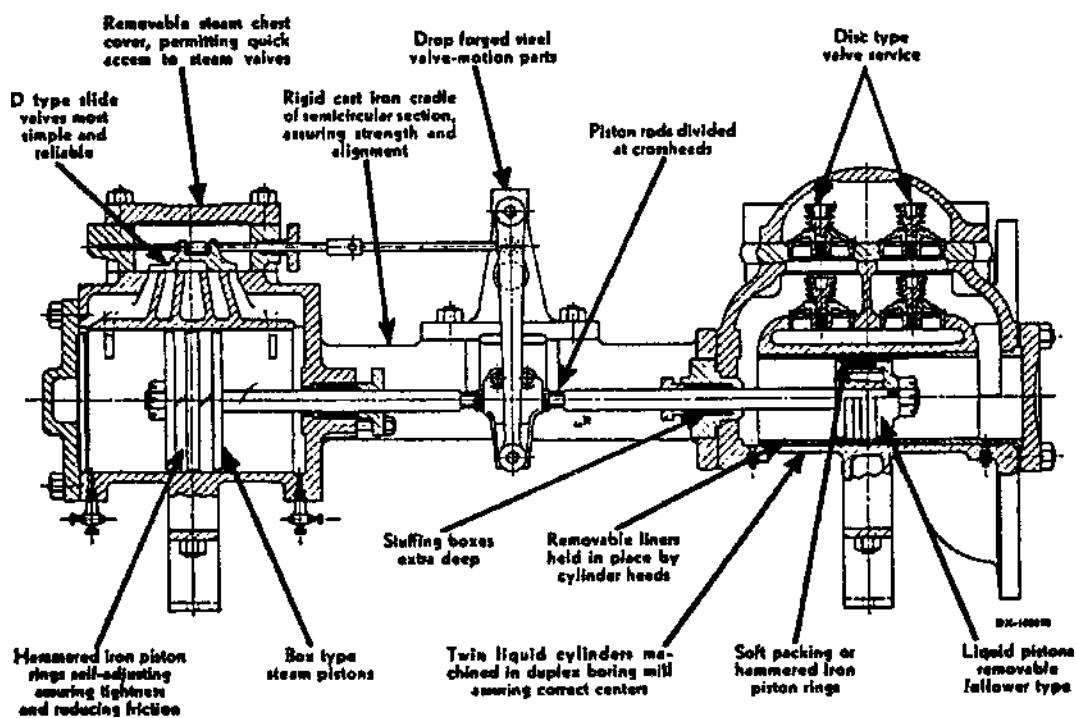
General service duplex steam-driven piston pump. (Courtesy of Worthington Corp.)
